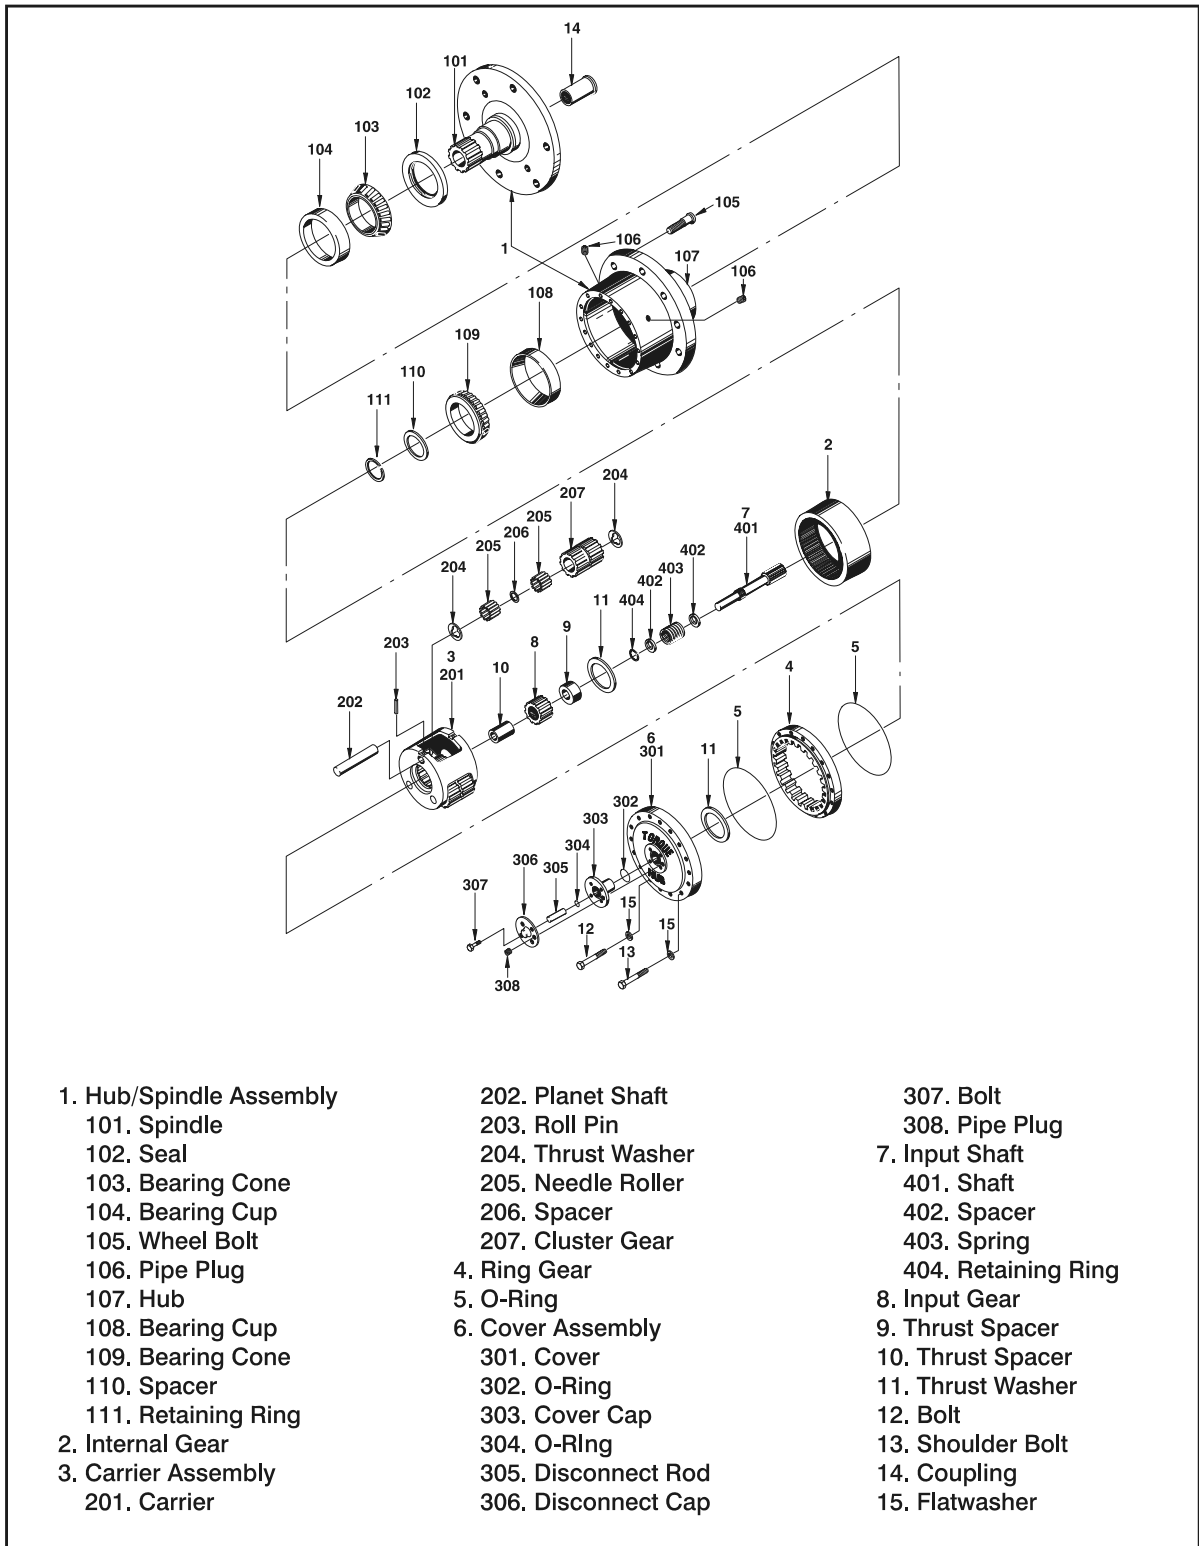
Drive Torque Hub - (2WD/4WD rear)
